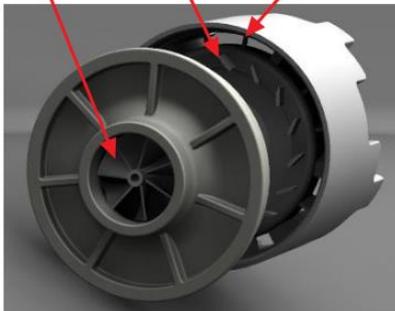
Three-dimensional model of the tested centrifugal compressor
